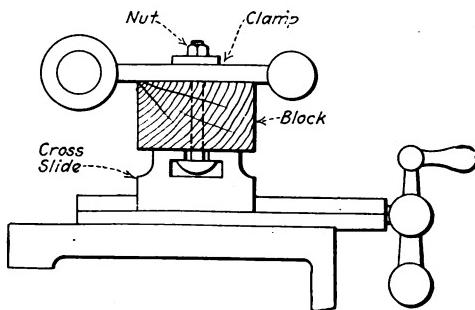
A—Showing how the casting is mounted to the cross slide for boring
